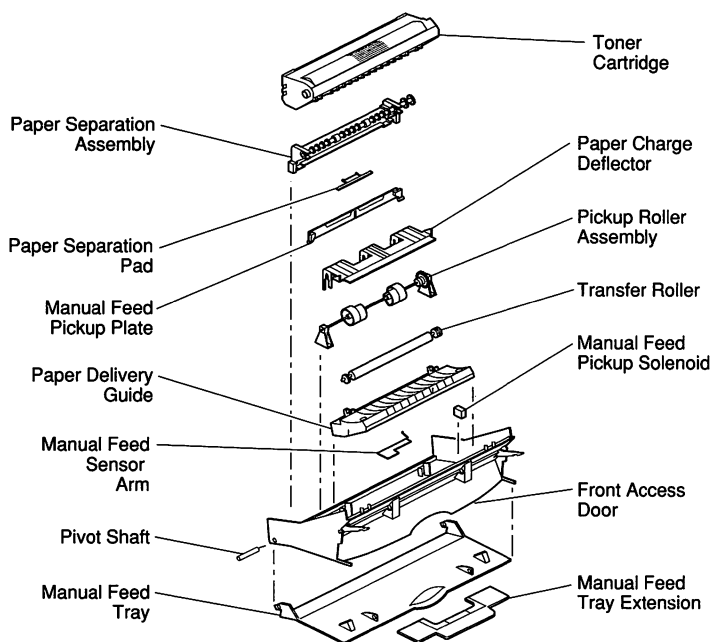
LaserWriter Select 300/310 Exploded View (1 of 2)
